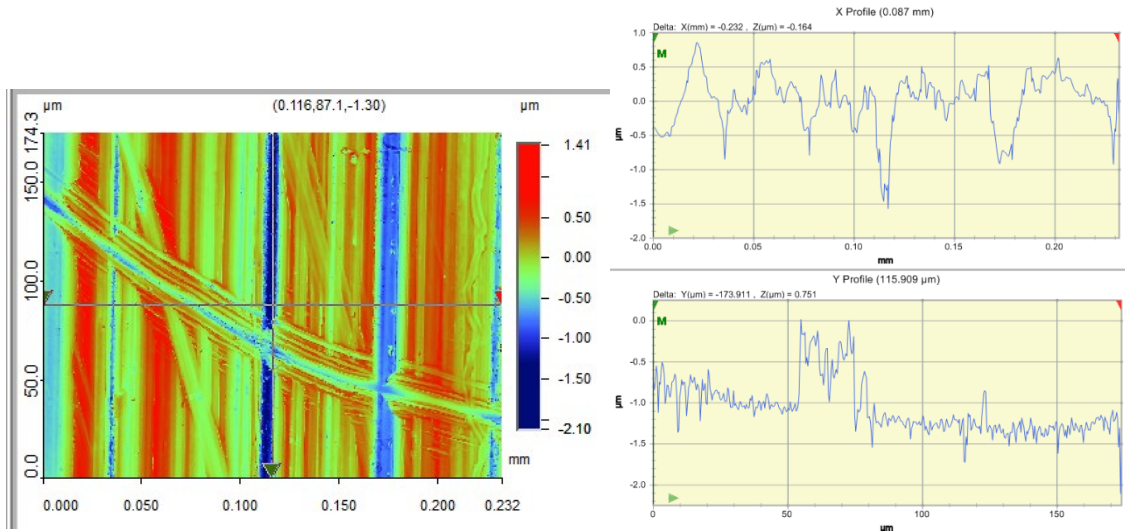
Surface Topography – VSI – Retracting tool marks
